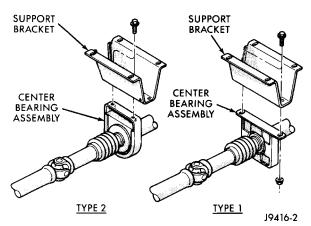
Two-Piece Propeller Shaft Center Bearing
